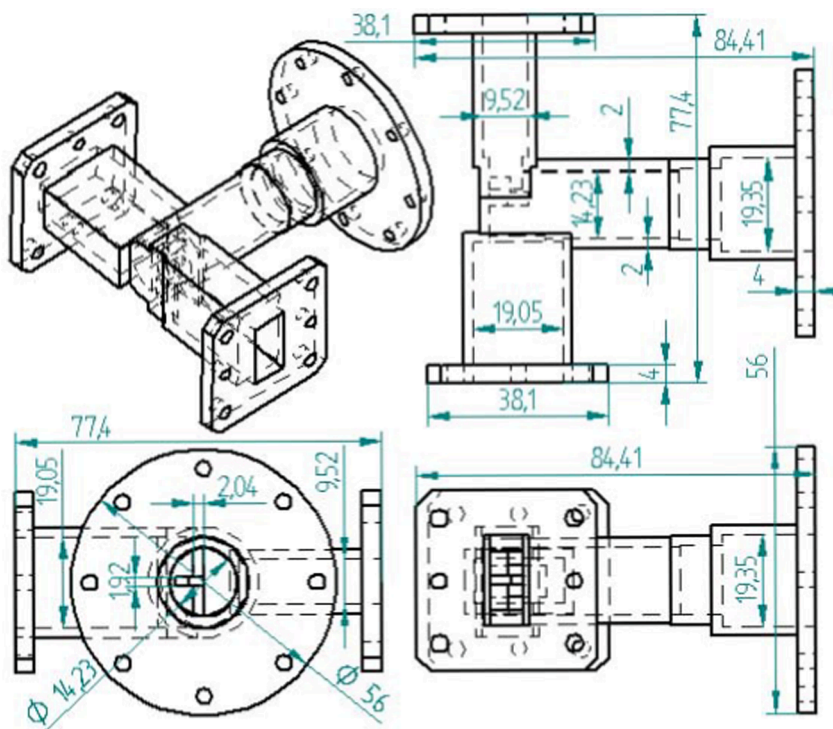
CAD views for the single-block printing of the Ku-band OMT: 3D, side, top and bottom views. Main dimensions in mm.
